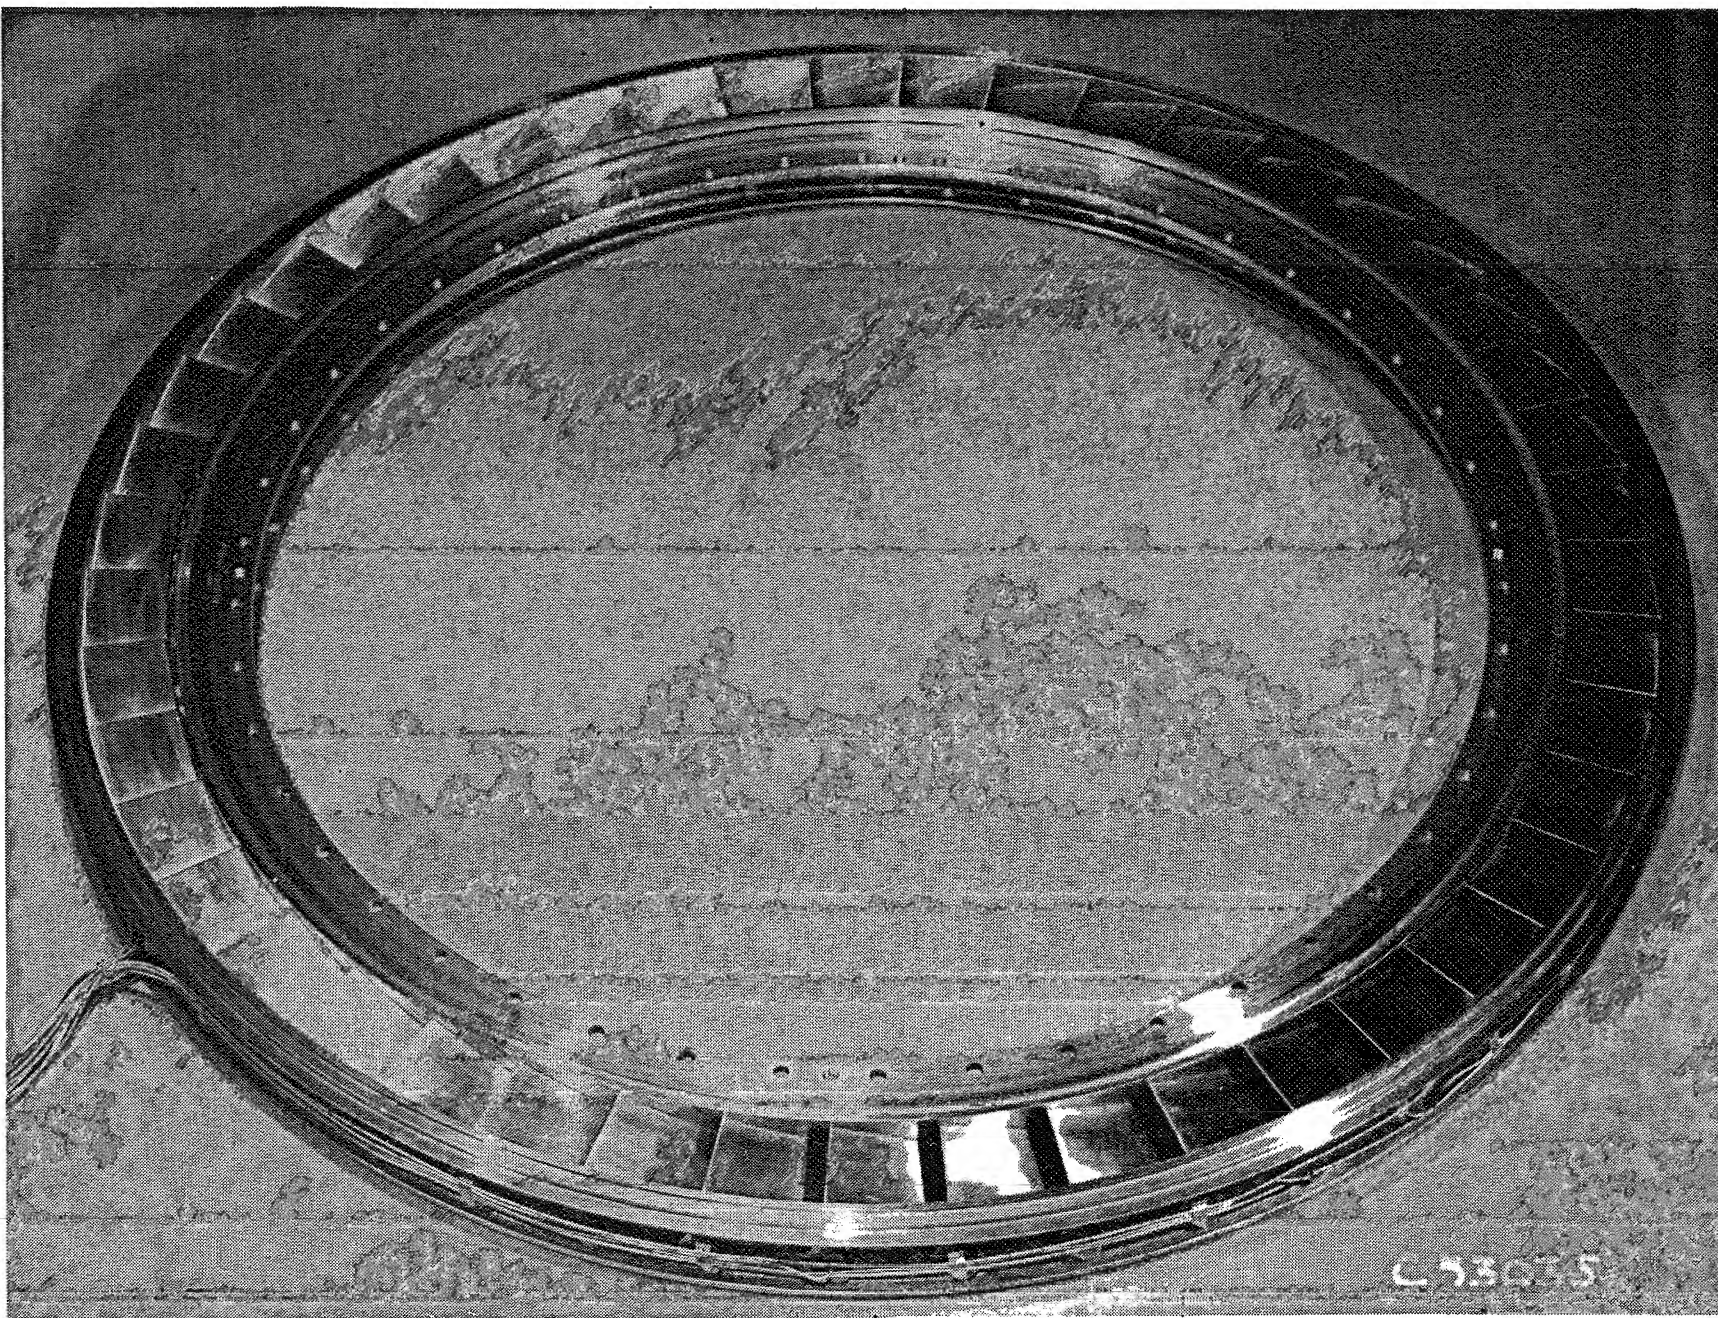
Stage 1 Nozzle Assembly (Aft Looking Forward)
